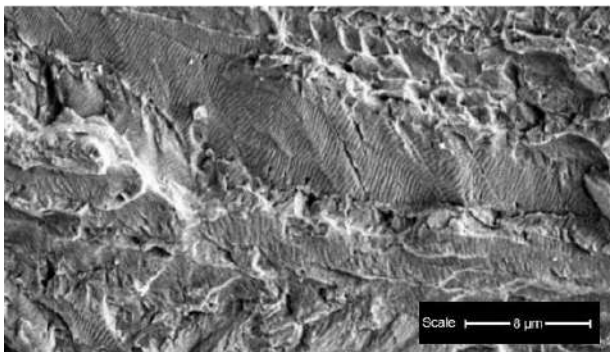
Fracture surface photograph in B4S34 specimen [7].
